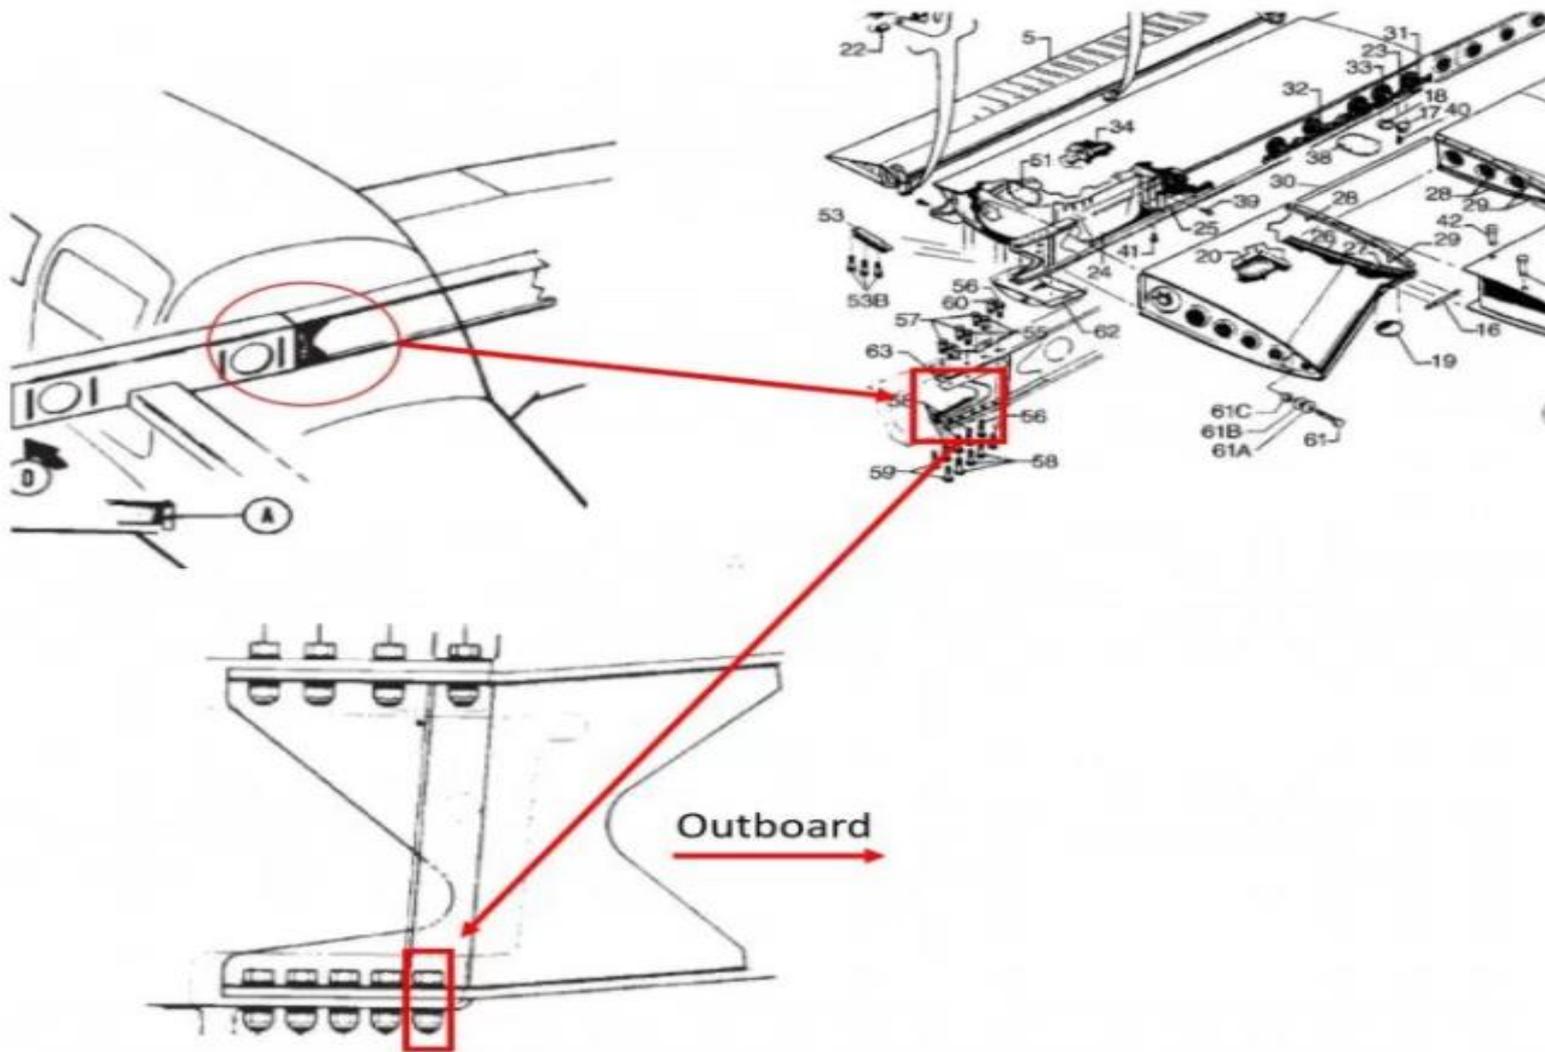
Exploded view of left wing spar assembly and attachment bolts.
